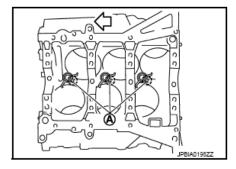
Identifying Oil Jet Dowel Pin Courtesy of NISSAN NORTH AMERICA, INC.
